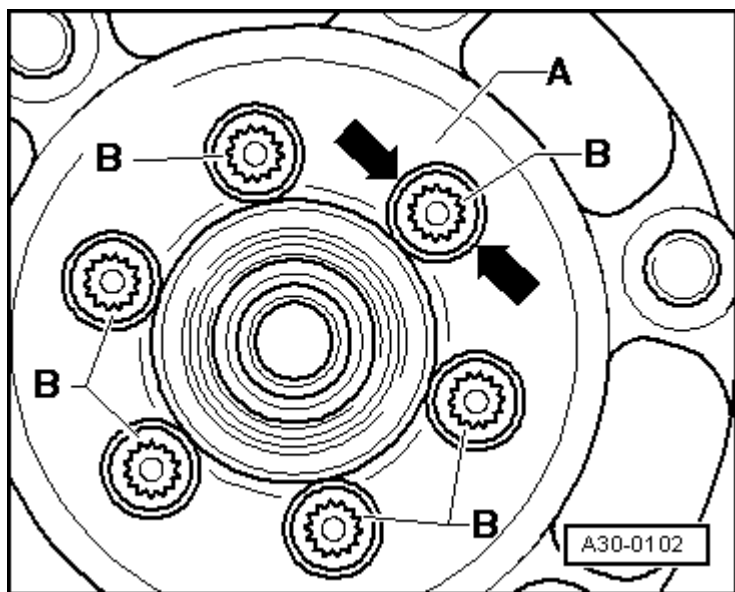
Identifying Dual-Mass Flywheel & Bolts
